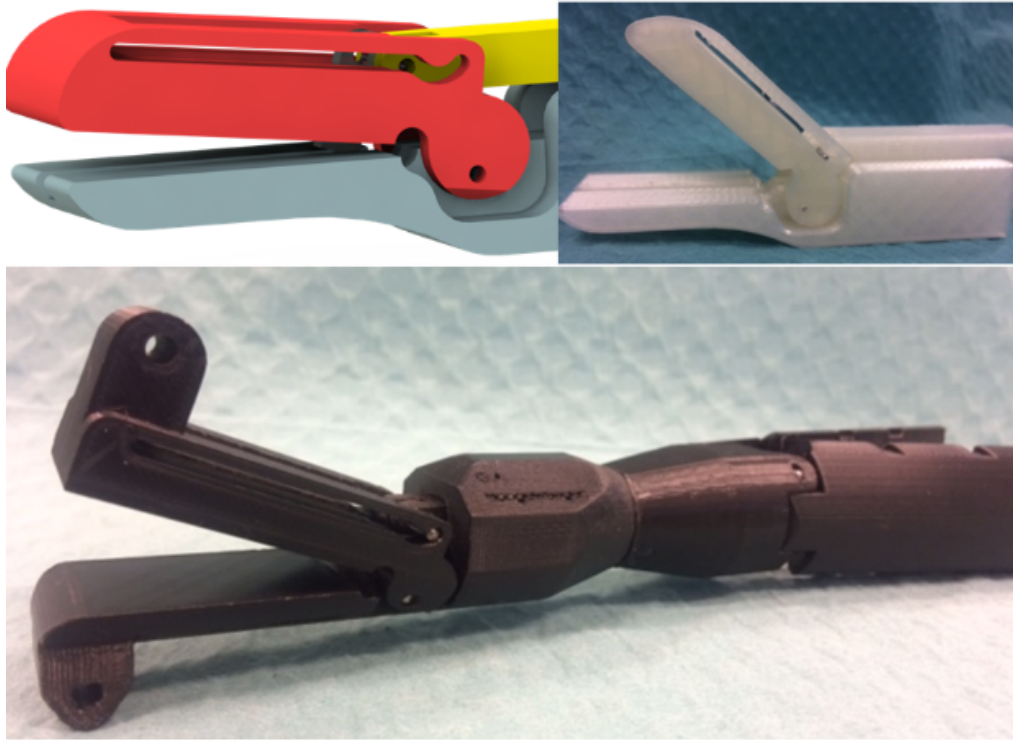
(Top left) CAD drawing of tip components. (Top right) 3D-printed concept for mechanical evaluation. (Bottom) Improved concept ready for experimental evaluation.
